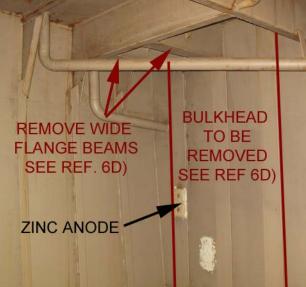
Aft Side of Bulkhead 38 (in Hold #3), Looking Forward.
